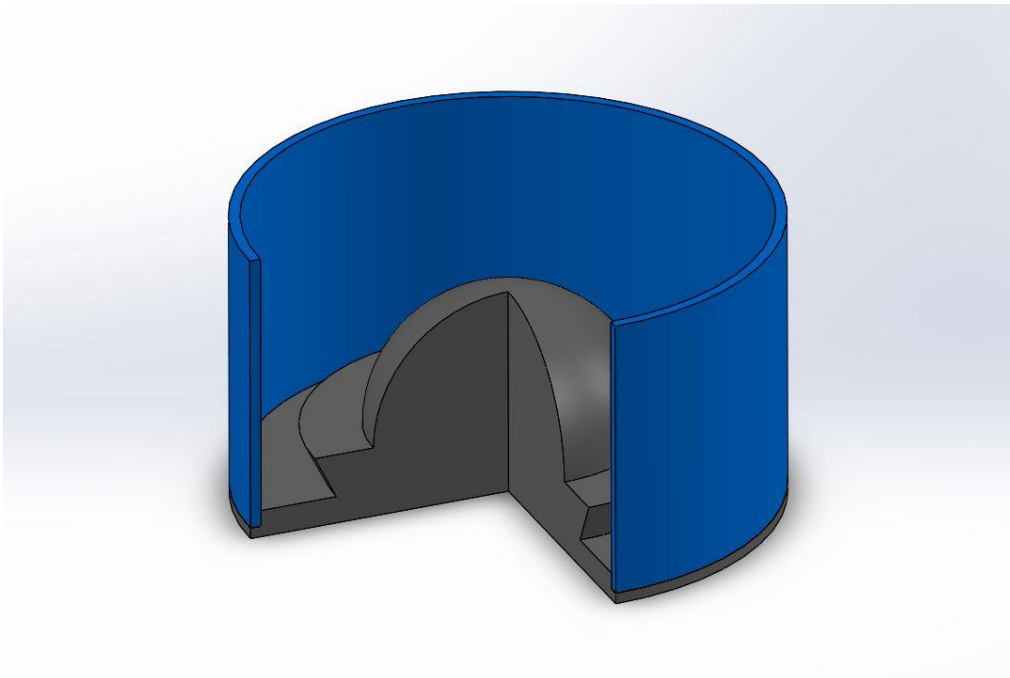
Cutaway view of the plastic mold negative and silicone retainer assembled.
